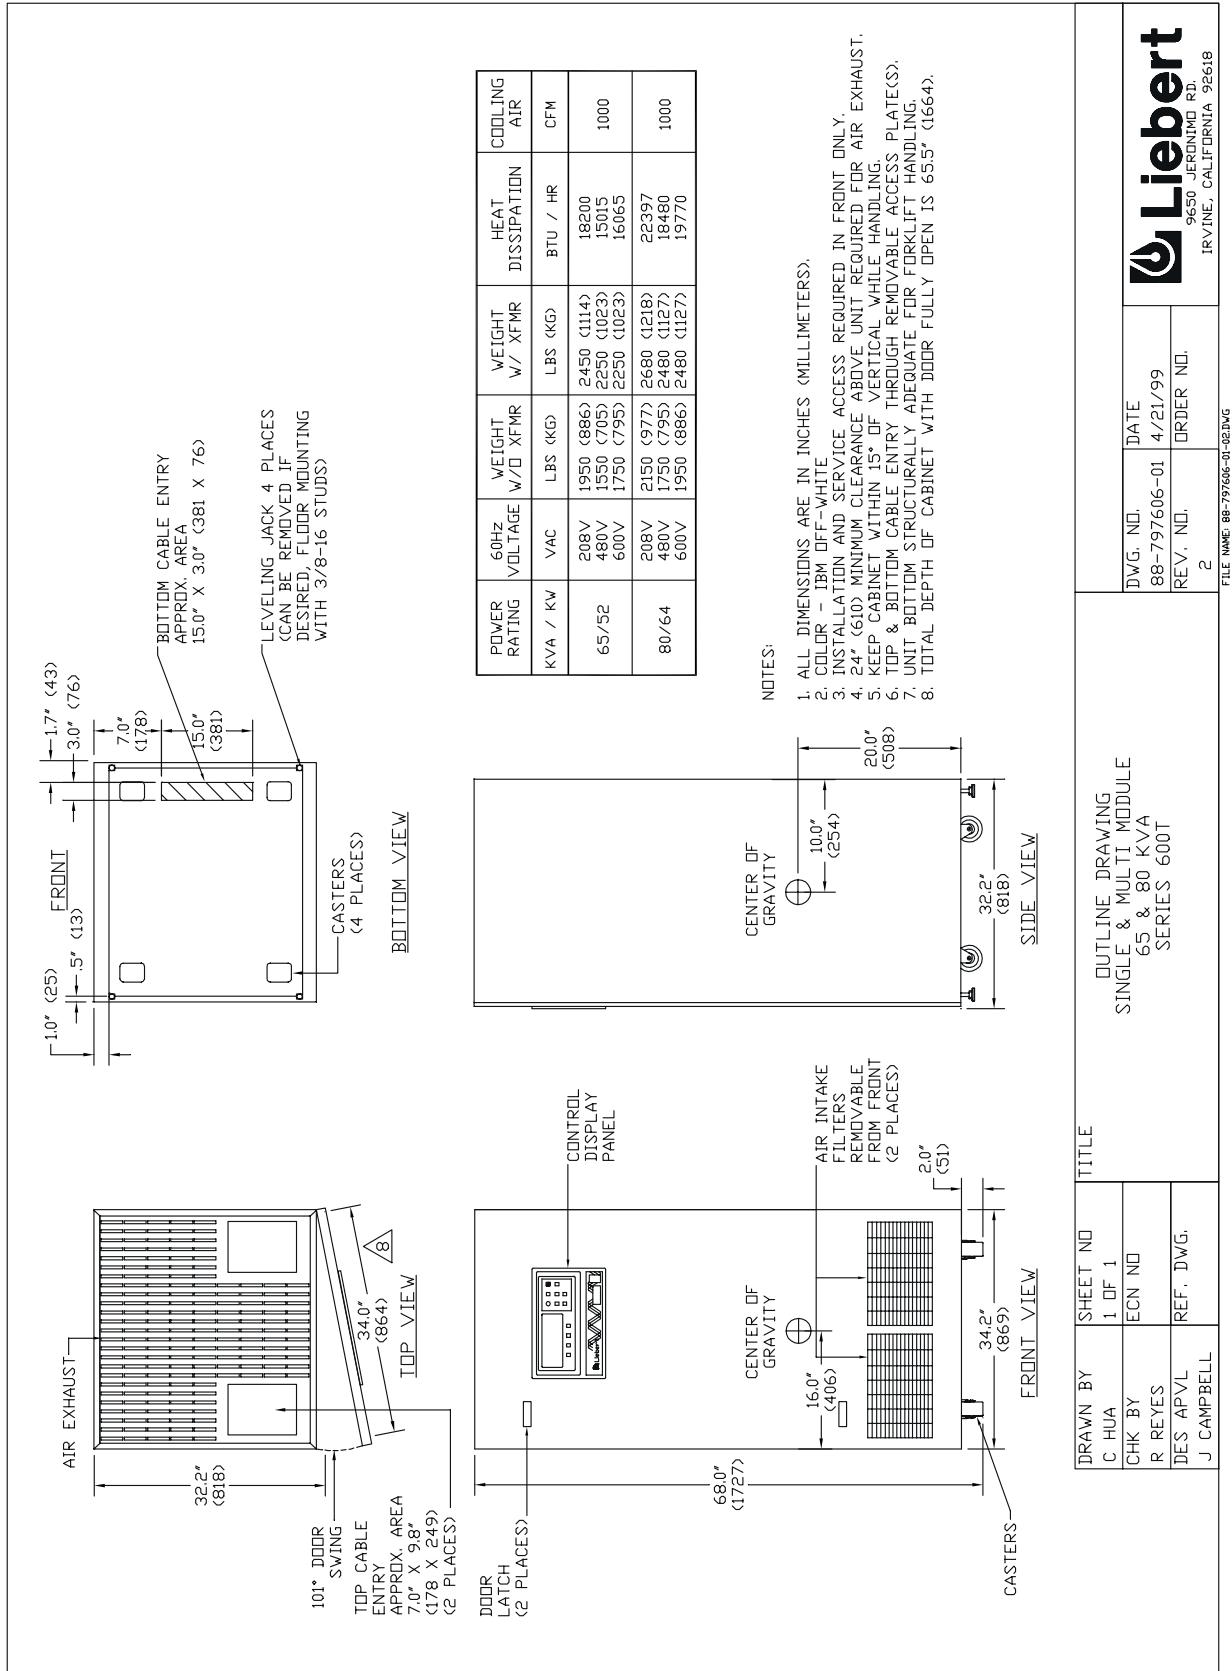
Outline Drawing Single and Multi Module 65 & 80 kVA
